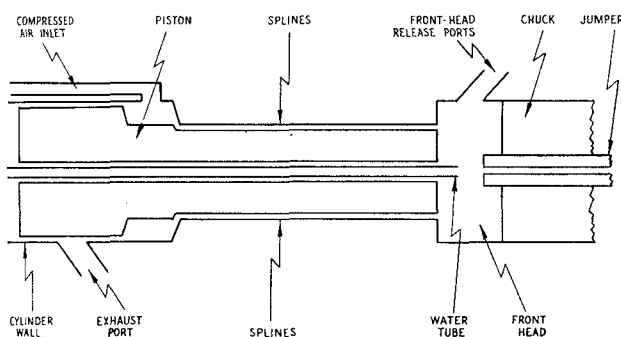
Figure VI.—STANDARD MACHINE. Splines open before exhaust port opens.
